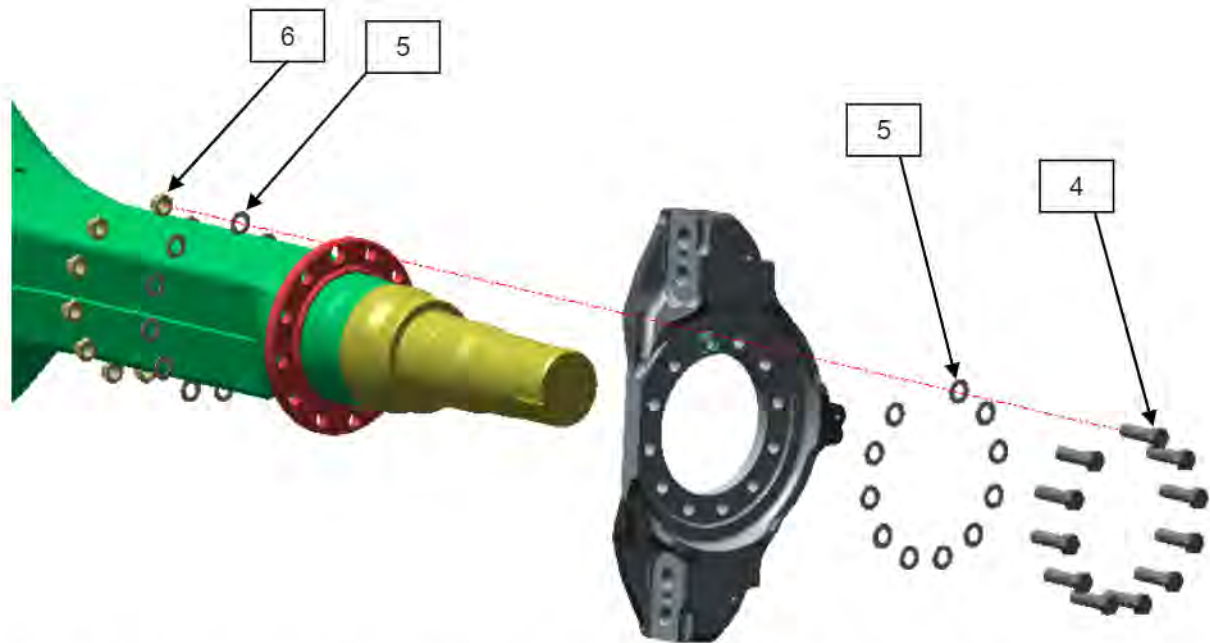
Exploded View of the Axle, and Hardware Needed for the attachment of the 410 Adapter Plate
